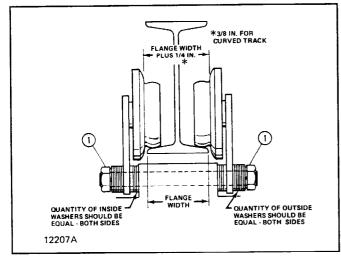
Sectional View of Trolley showing proper wheel and washer spacing.
